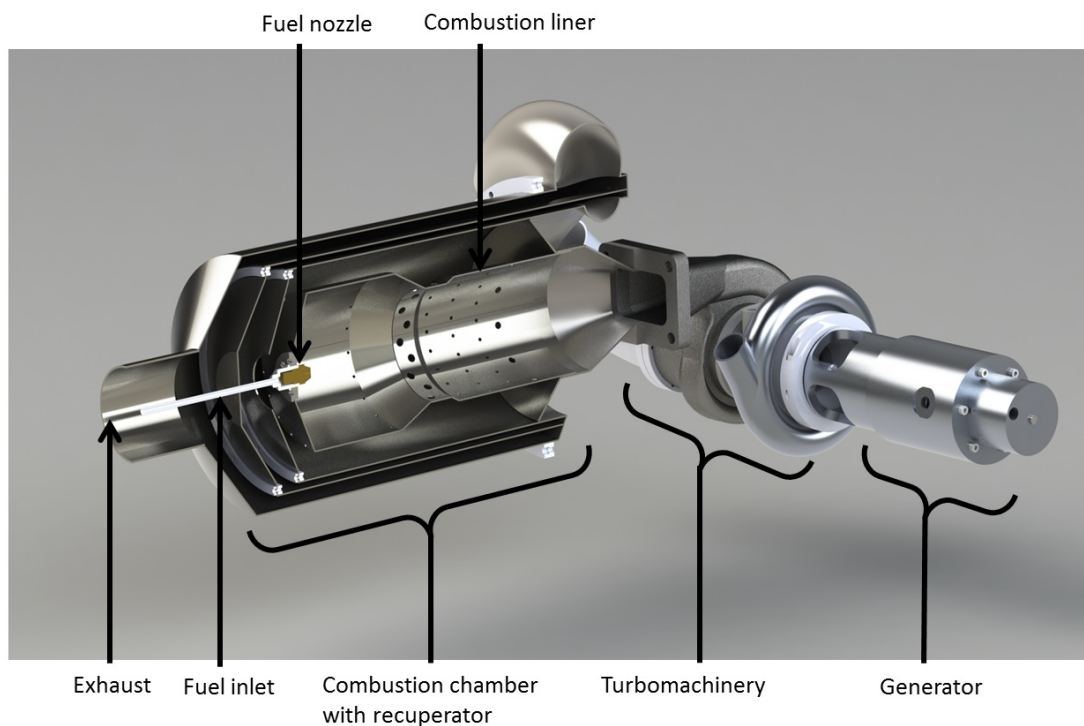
Overview of gas turbine engine with section view of the combustion chamber and recuperator
